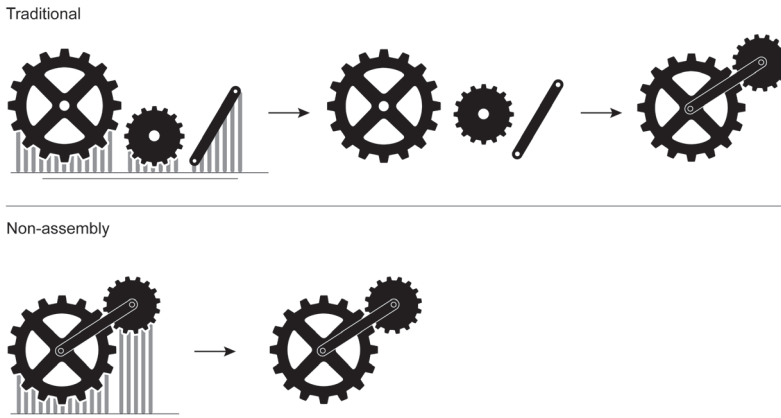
Difference between traditional additive manufacturing, where it is necessary to produce and assemble individual parts, and non-assembly additive manufacturing, where the entire mechanism is printed in a single production step. The separate parts are shown in black, while the grey bars represent the support material.
